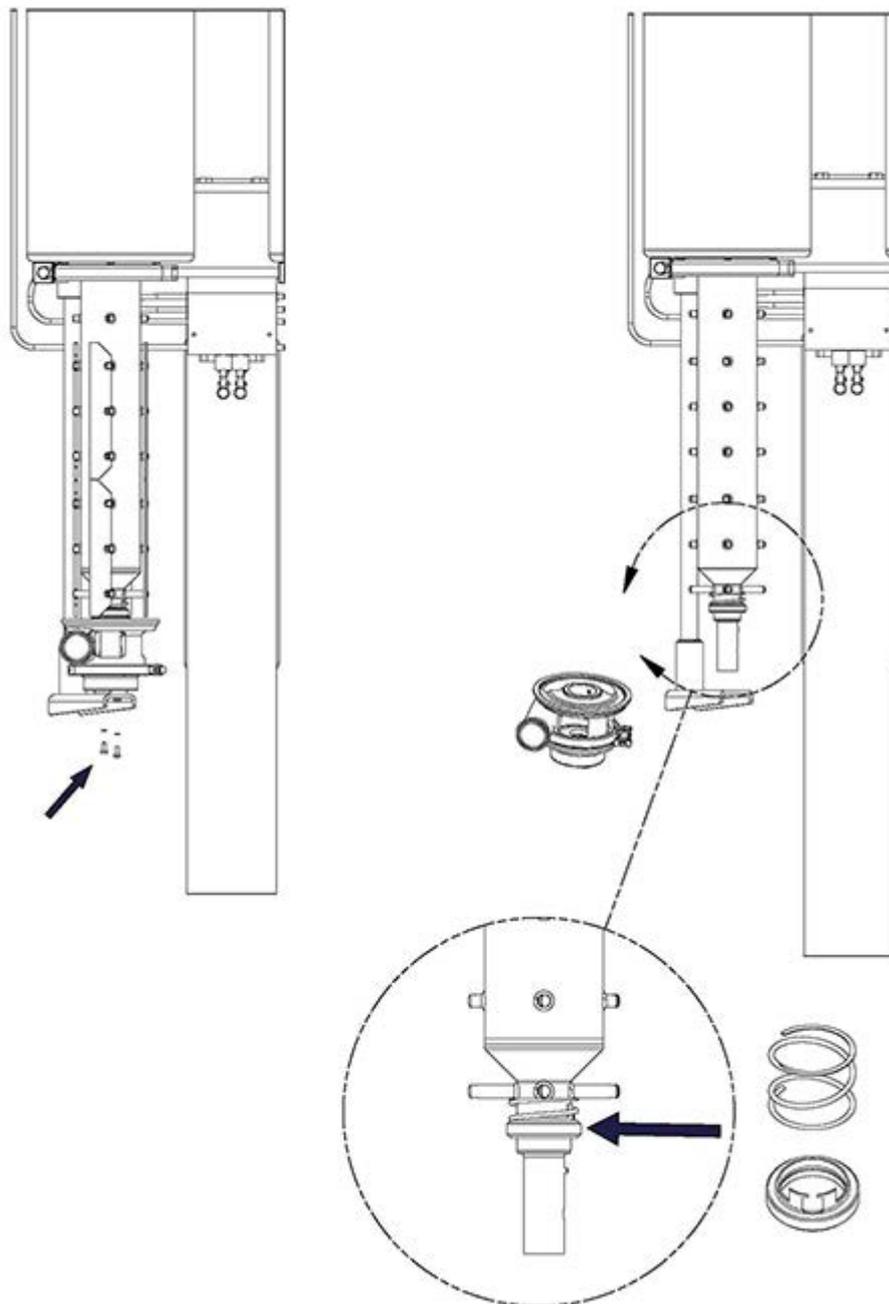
B. Using Helper Plate to Access Lower Head & Seal Components
